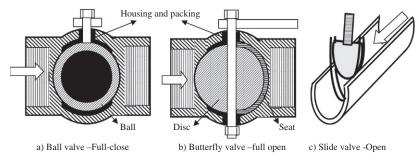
Sections of ball, butterfly, and slide valves.
